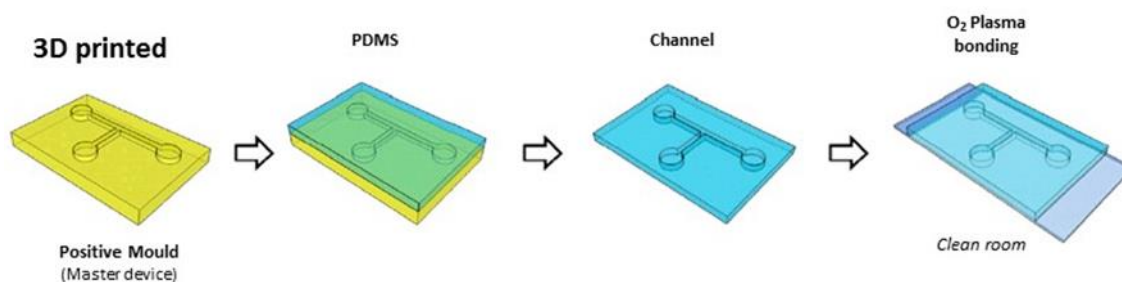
Fabrication steps of the 3D printed replica mould process (adapted from Carugo et al.)<sup>125</sup>
